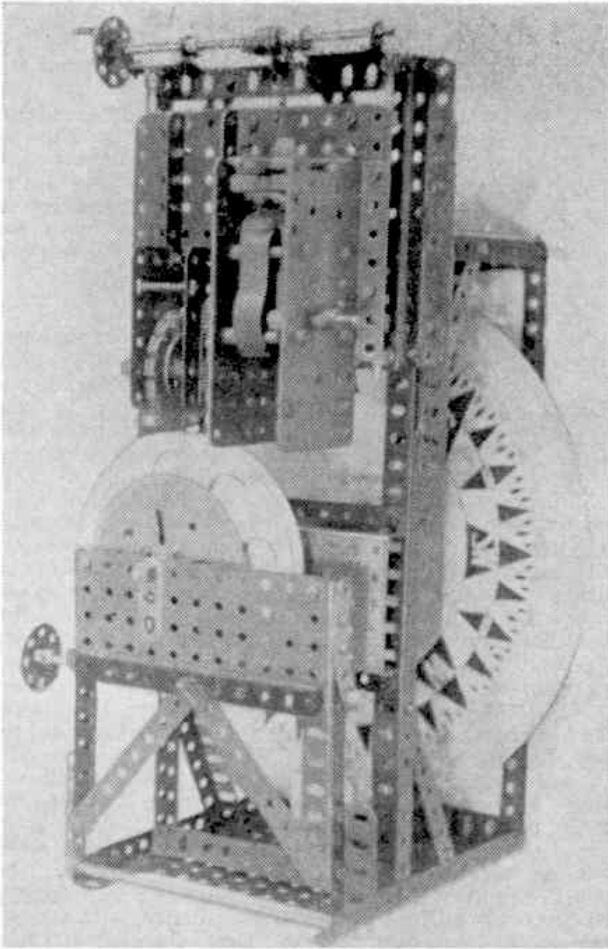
The gear-cutting machine designed and built in Meccano by John Nowlan, Dagenham.
